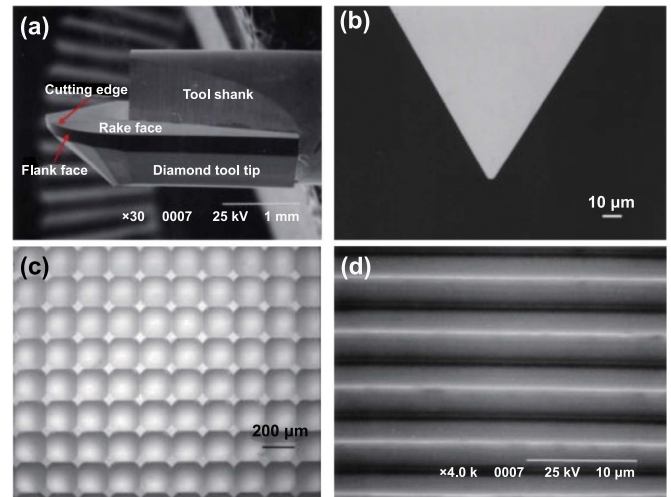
Micro diamond tools fabricated with the mechanical lapping method and the corresponding machined microstructured arrays: (a) micro milling tool. Reproduced from [48], with permission from Springer Nature. (b) Micro cutting tool. Reprinted from [193], Copyright © 2009 Elsevier B.V. All rights reserved (c) Microsphere arrays. Reproduced from [48], with permission from Springer Nature. (d) V-groove arrays. Reprinted from [193], Copyright © 2009 Elsevier B.V. All rights reserved.
